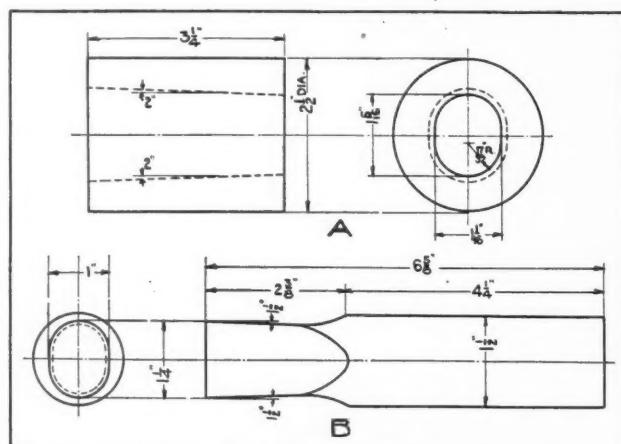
Elliptical Shaped, Tapered Carbon Tool-Steel Punch and Die machined with the Equipment shown in Figs. 1 and 2
